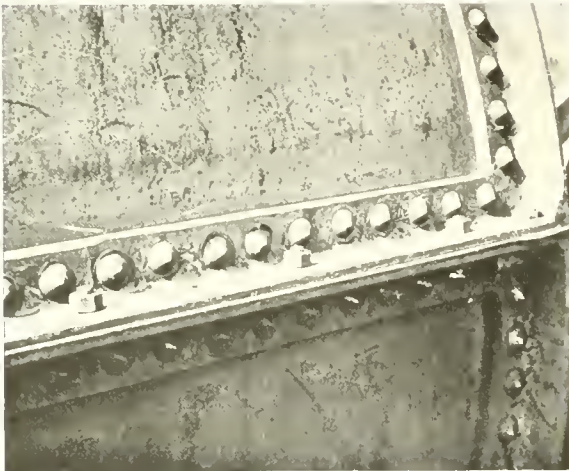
How the Lincoln Arc Welder simplifies forward corner riveting. The edges of the angle irons were formerly machined at their meeting edges and riveted to corresponding strips on the inside of the sheet. They are now simply welded to the sheet and to each other at the corner.
